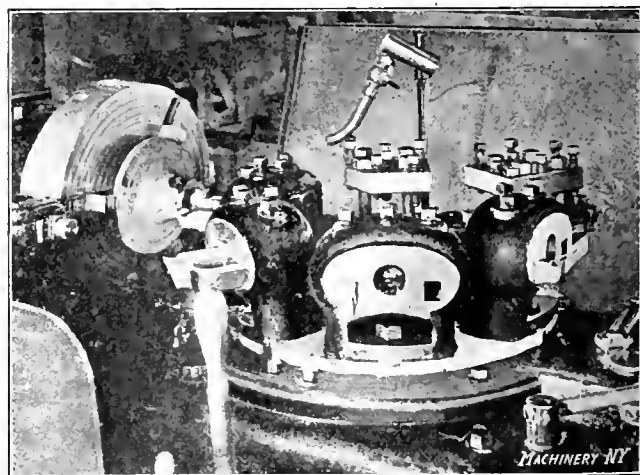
The First Turret Lathe Operation in Finishing the Gear Case Covers
